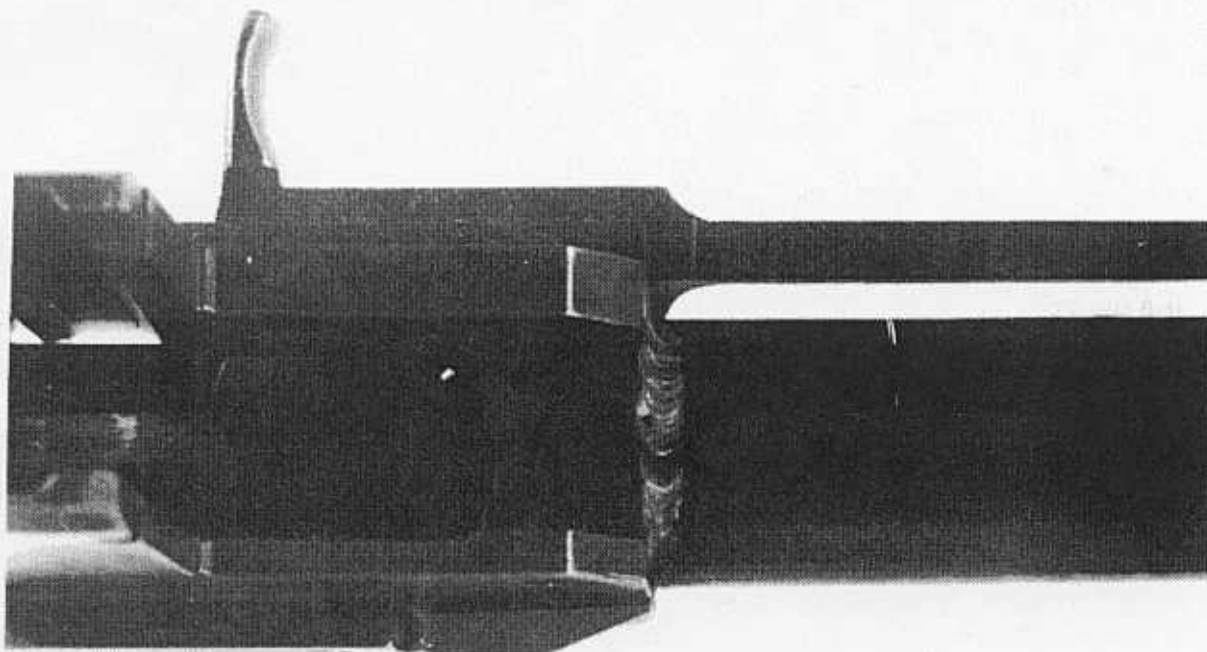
MODIFICATION OF M1 RIFLE, BARREL AND RECEIVER WELDING
